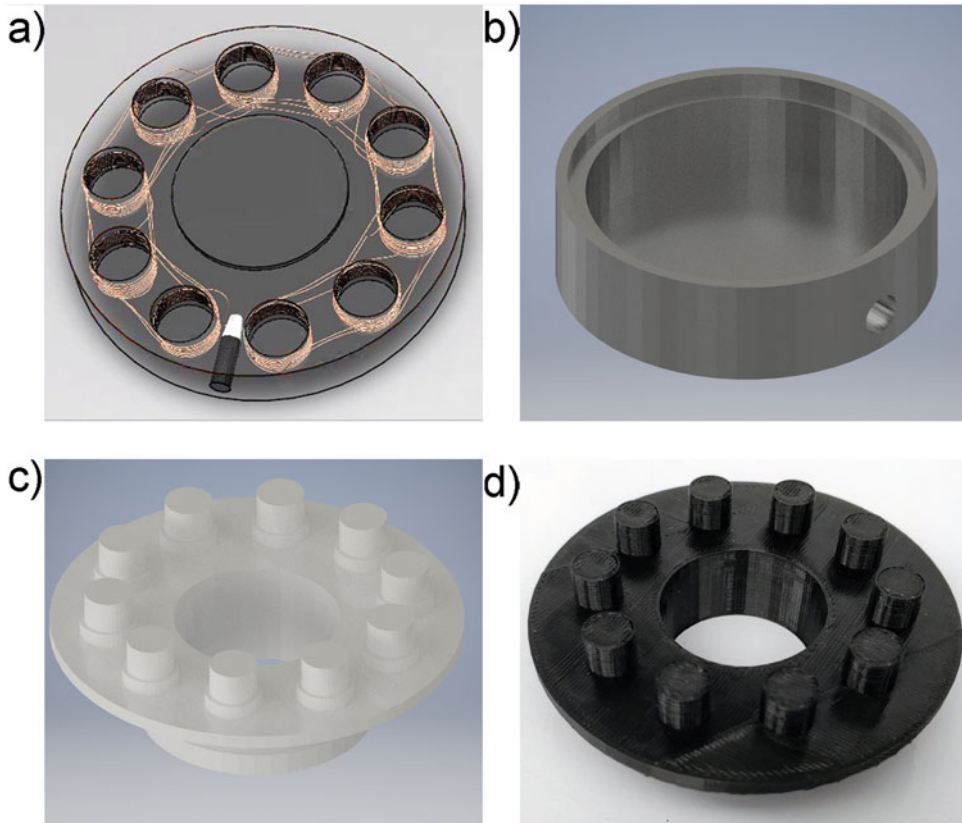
Transparent PDMS heater design. (a) 3D rendering of the incubator design demonstrating resistive heater surrounding each of the well holders (b) CAD design of the bottom mold (c) CAD design of the top mold with cylindrical protrusions for the microwells 7 mm in diameter and 7 mm in depth, (d) 3D printed mold
